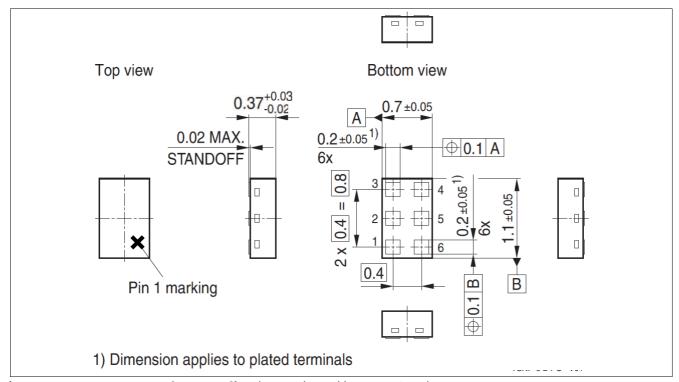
TSNP-6-2 Package Outline (top, side and bottom views)
